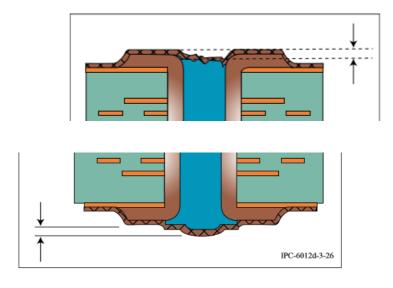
Surface Copper Wrap Measurement for Filled Holes
